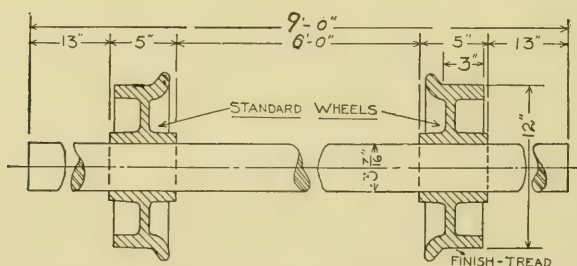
A. — General Sketch of Wheels and Axle for Mounting Car Body, Showing Dimensions.
